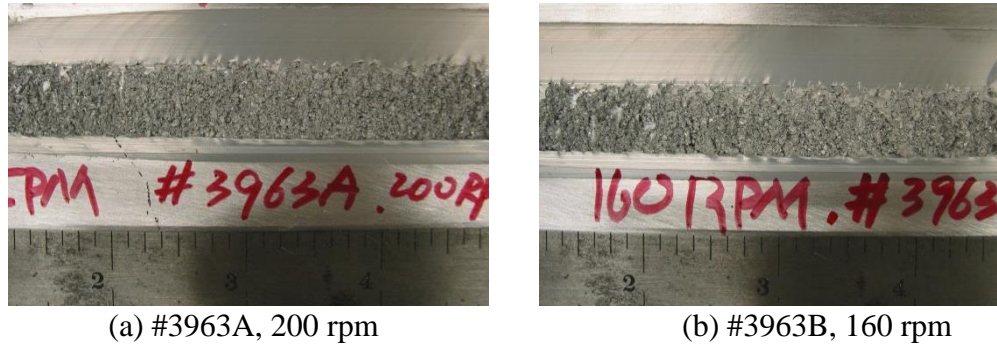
Joint surfaces of SSSP: T+3F pin, 51 mm/min, Fz 73.4 KN, 0° tilt
